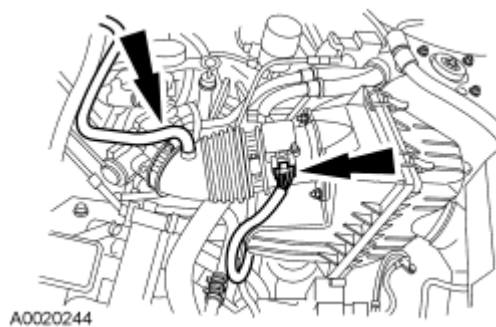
Locating Breather Tube & Mass Air Flow (MAF) Sensor
